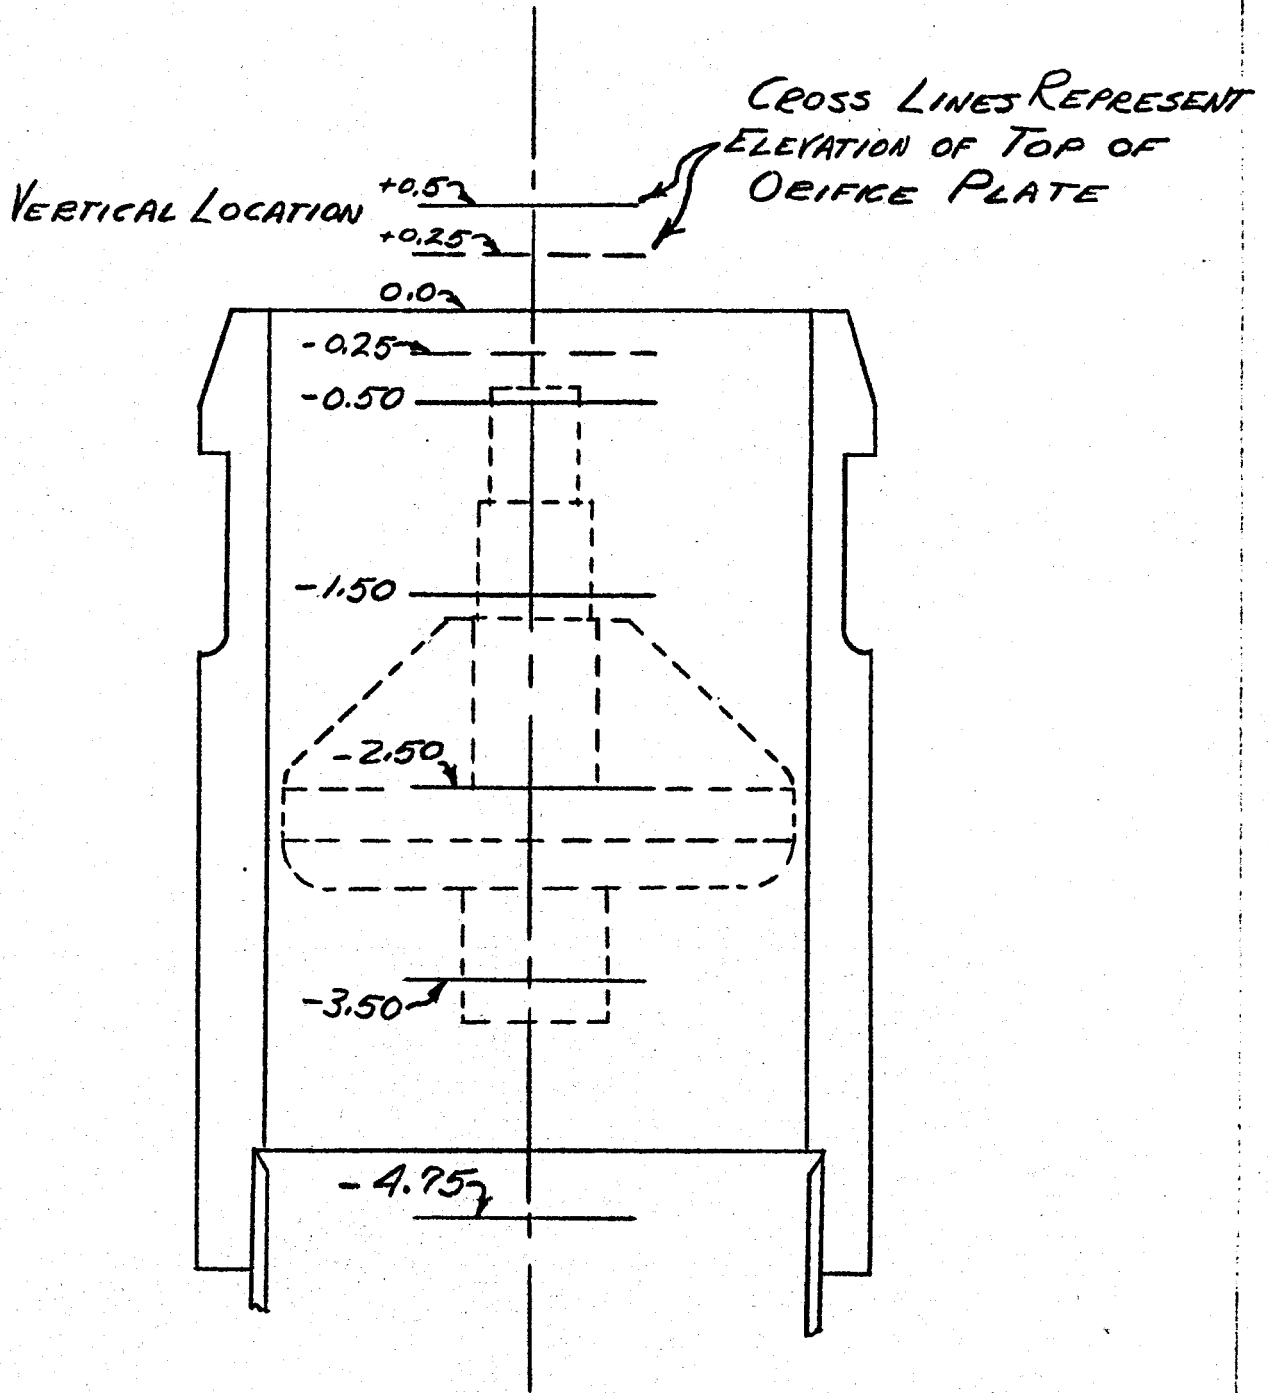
CROSS SECTION OF MODERATOR SPACER RING WITH ORIFICE ASSEMBLY LOCATED AT ELEVATION -2.5
